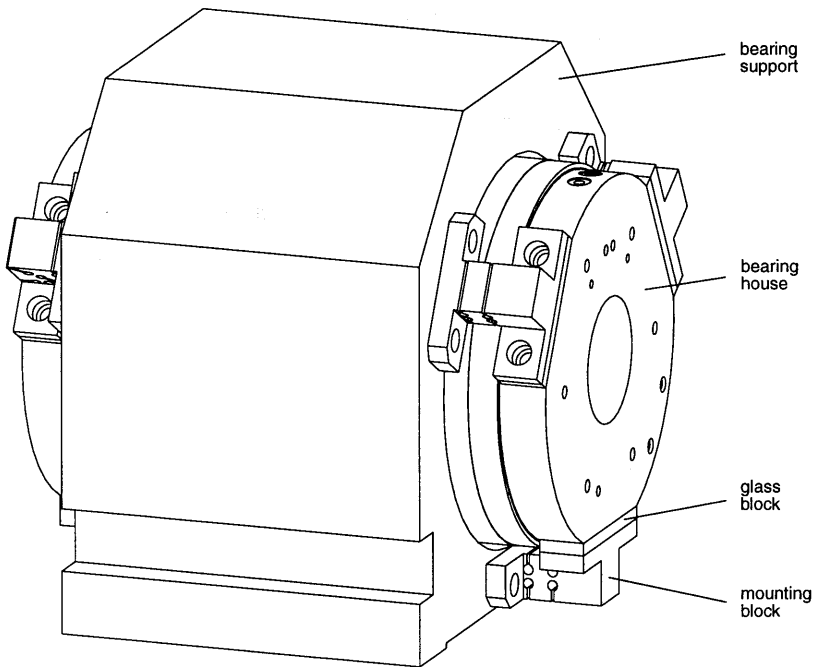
The bearing house mounted in the bearing support (bolts are not drawn)
